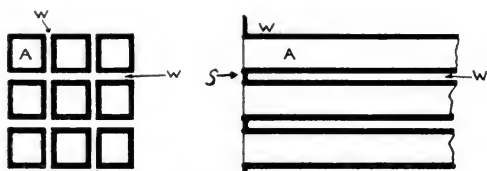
SECTION OF HONEYCOMB RADIATOR, FRONT AND SIDE ELEVATION.
